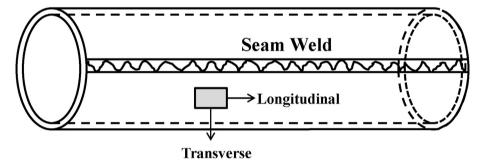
Longitudinal seam weld and direction definitions.
